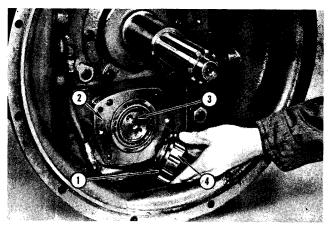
REMOVING DISC CARRIER 1. Grit Seal 3. Countershaft 2. Bearing Adaptor 4. Clutch Brake Disc Carrier
